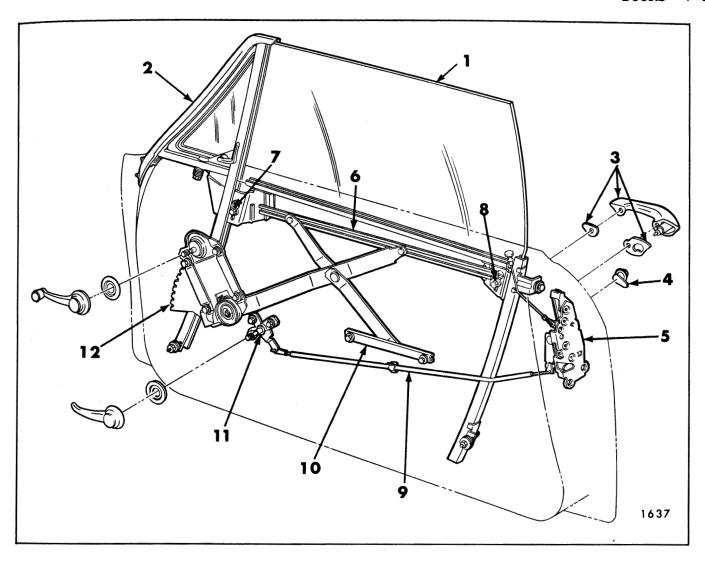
Front Door Hardware "Z-37 and 67" Styles - "39" Similar
